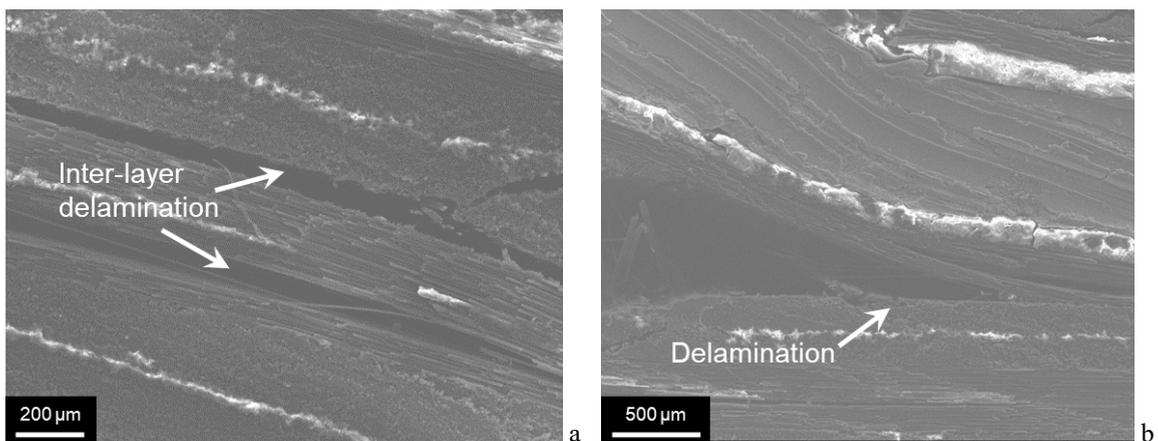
Fracture morphology for the short beam specimen bonded with adhesive: a) upper zone; b) lower zone.
